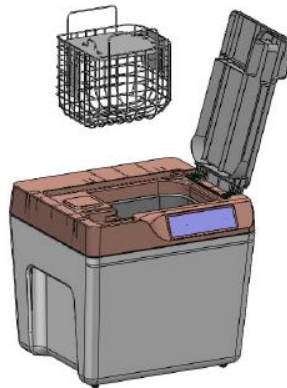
Housing assembly and Dual Level Part Basket of the HP Designjet 3D Removal System [23]
